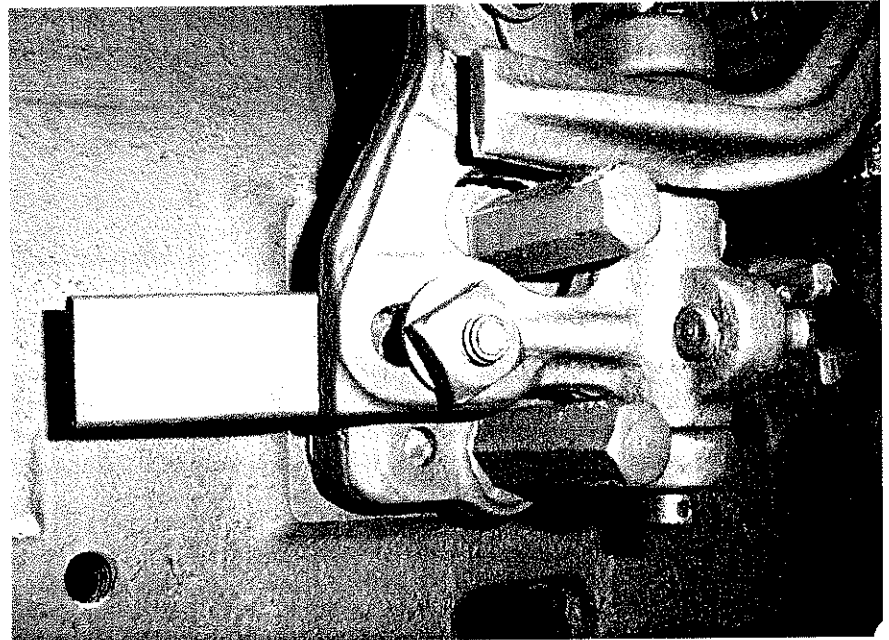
Threaded hole below detent blade and long-headed bolts securing governor mechanism.
